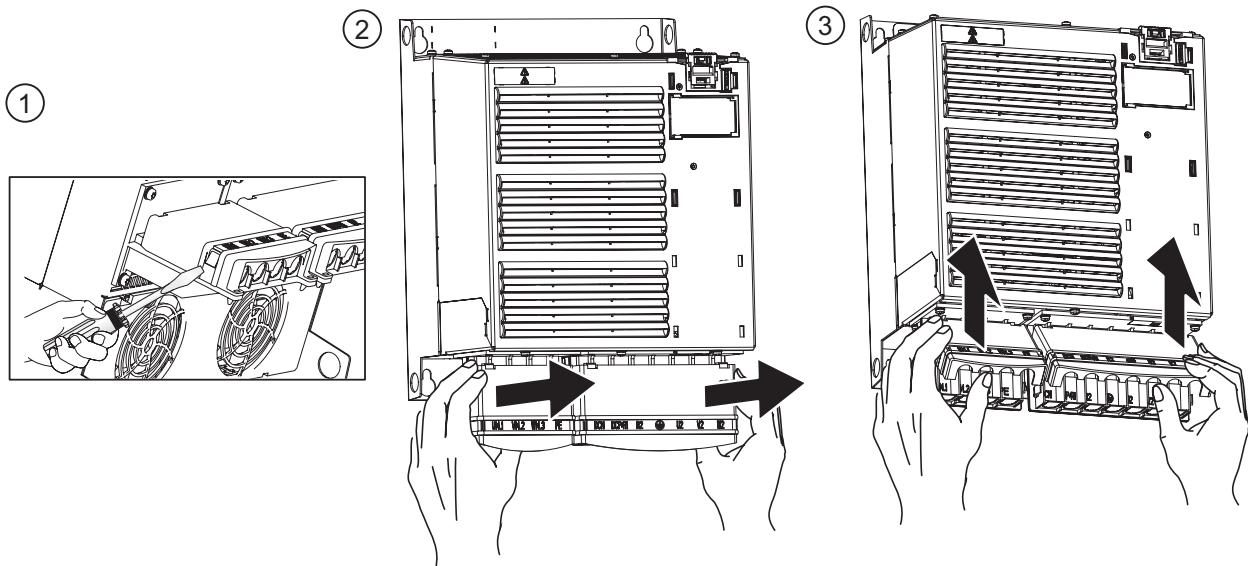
Access to power and motor terminals on FSD, FSE and FSF
